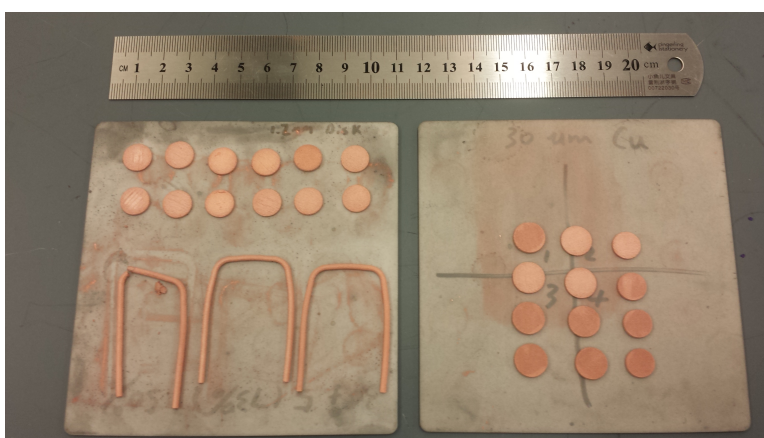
Photo of the third batch copper test specimens post kiln.
